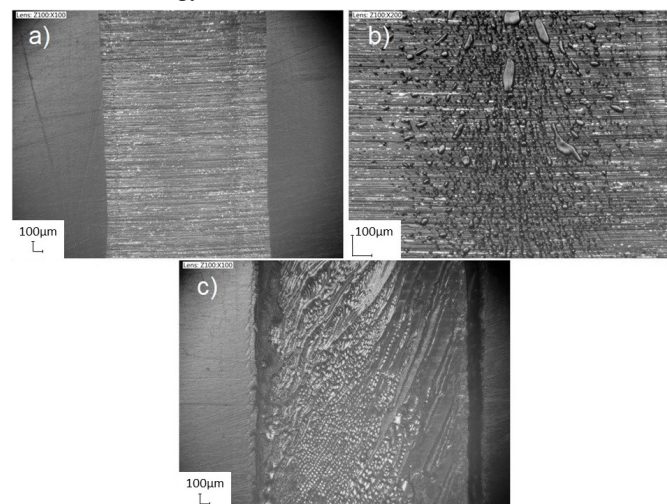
PA fracture surfaces, a) untreated sample welded with 240W-modulated power, b) untreated sample welded with 260W, c) pretreated sample welded with 260W.
